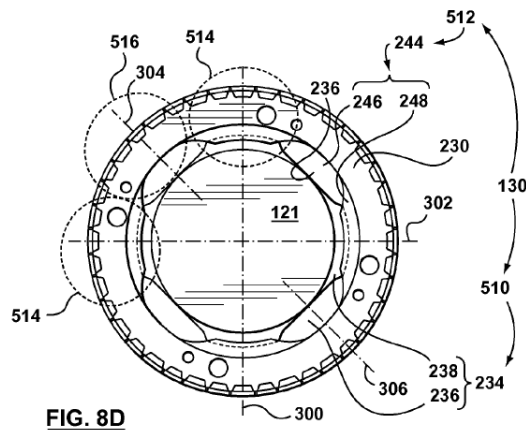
D, above, illustrates an end view of the locking mechanism in which the lock is placed in the locked condition. *Id.* at 13:32–33. Rod 121 transmits the clamping force 506 across teeth 238 and 248. *Id.* at 13:38–40. Then the clamping force is transferred to platens 122 and 120 and ultimately to mold 140. *Id.* at 13:40–42.
